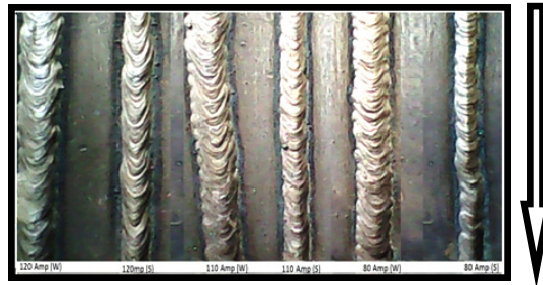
Show the weld bead at (80, 110 and 120 Amp) and with stringer and full weaving technique.
